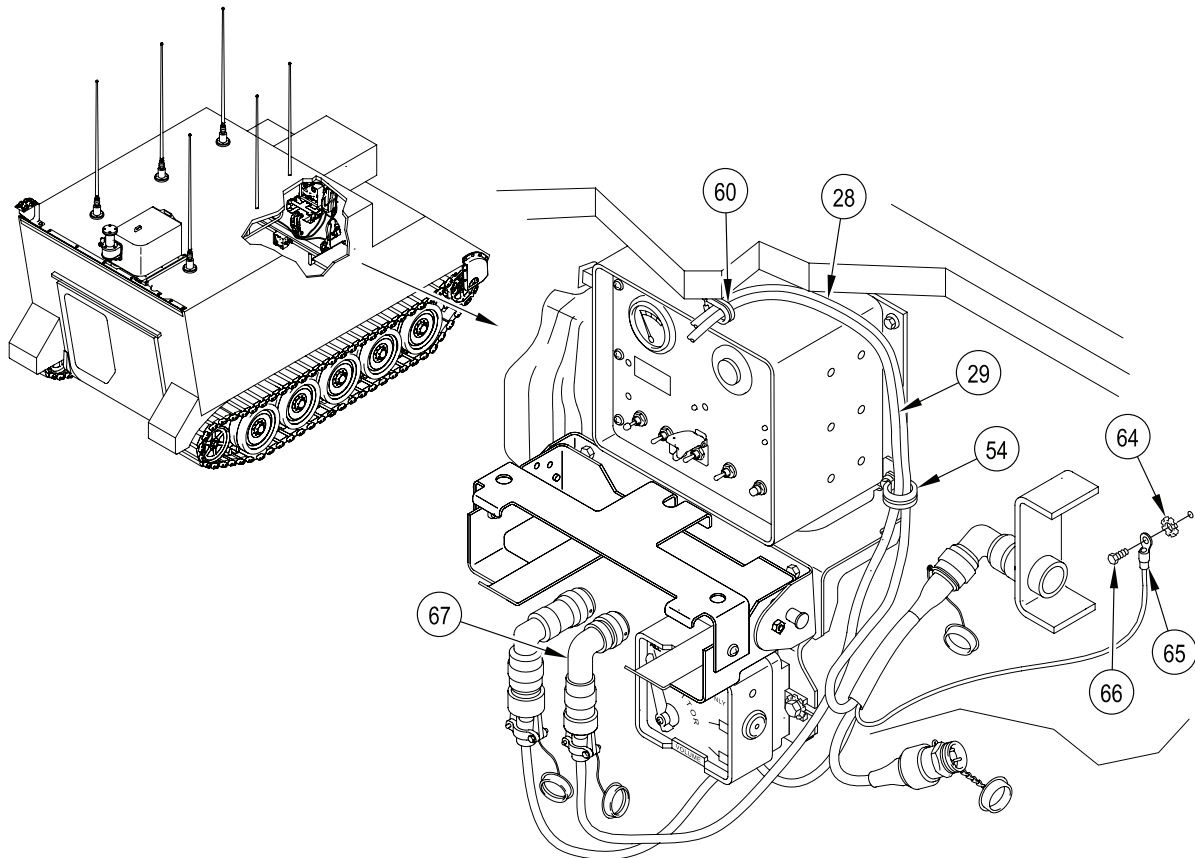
RCU Cable, Power Harness, and RCU to PDA Cable Installation (M577A3 Only)
